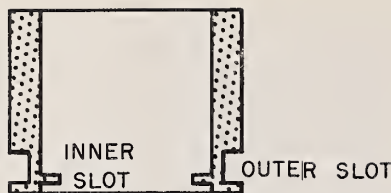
Probe coil form used in oil-film thickness indicator.
